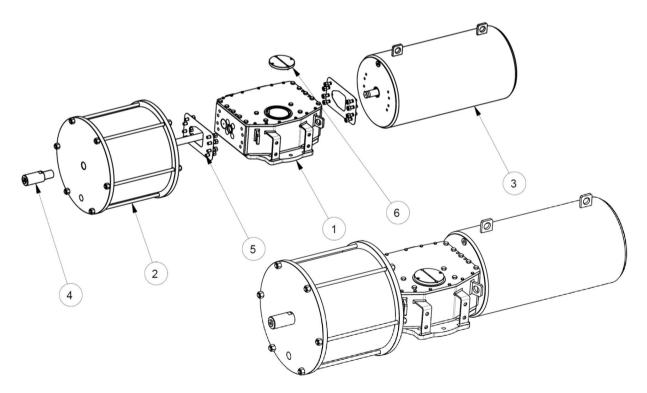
Main parts for RTQS actuator series (Spring to Close configuration)
